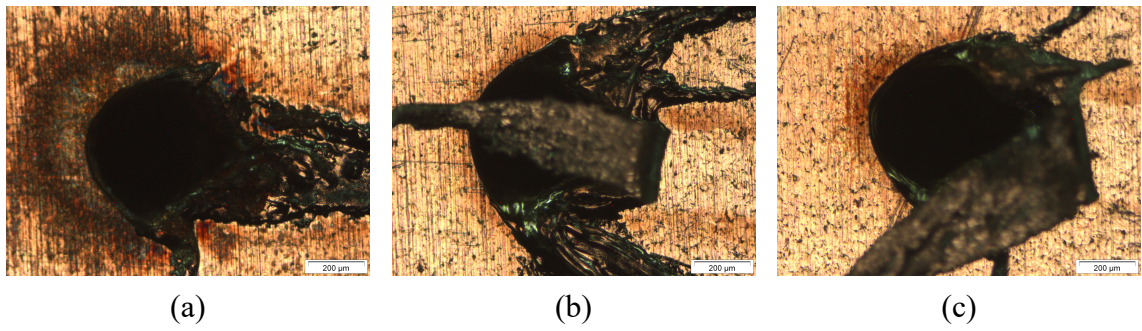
Holes top surfaces of 500 μm SS304 sheet
